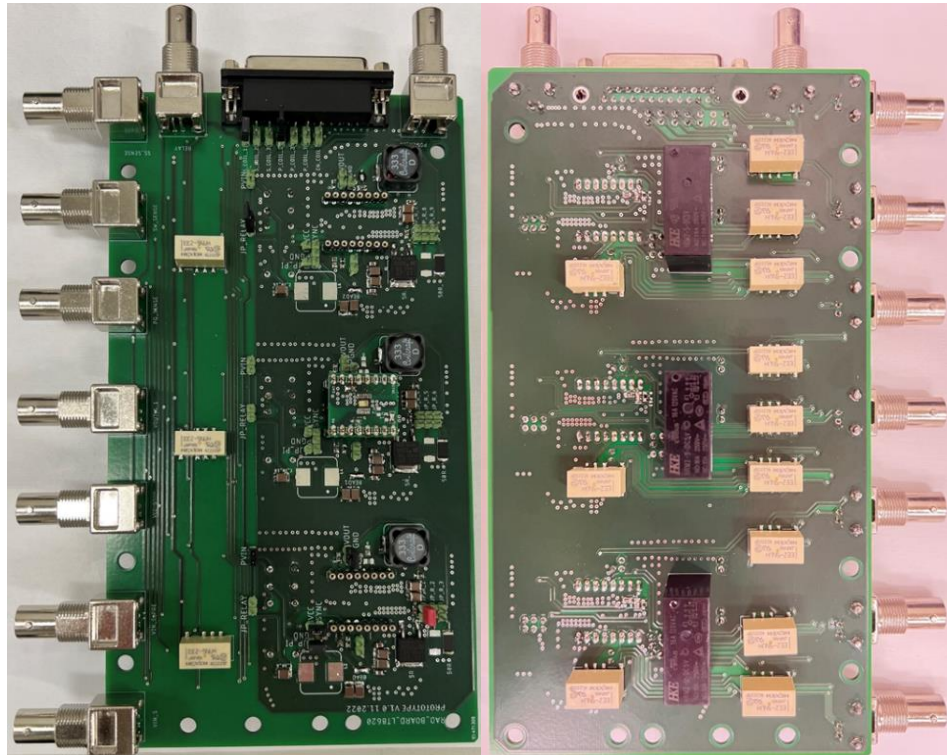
Top-side (left) and bottom-side (right) of the LT8610 test board
